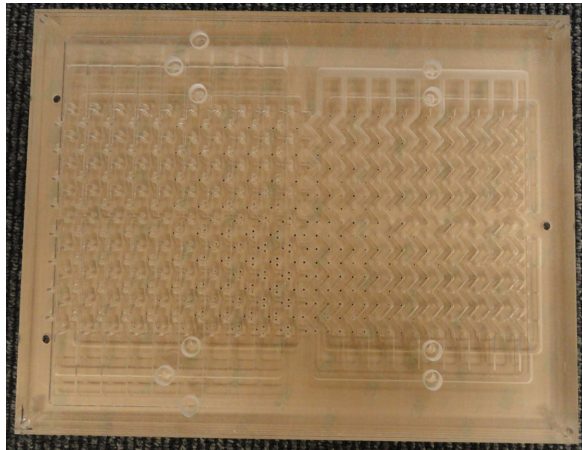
A picture of the back-side of the realised manifold. The three dark-coloured holes at the sides of the manifold are used for aligning the PCB plate and the manifold during the bonding process.
